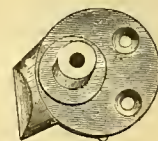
ECCENTRIC PIVOT-PLATE.
